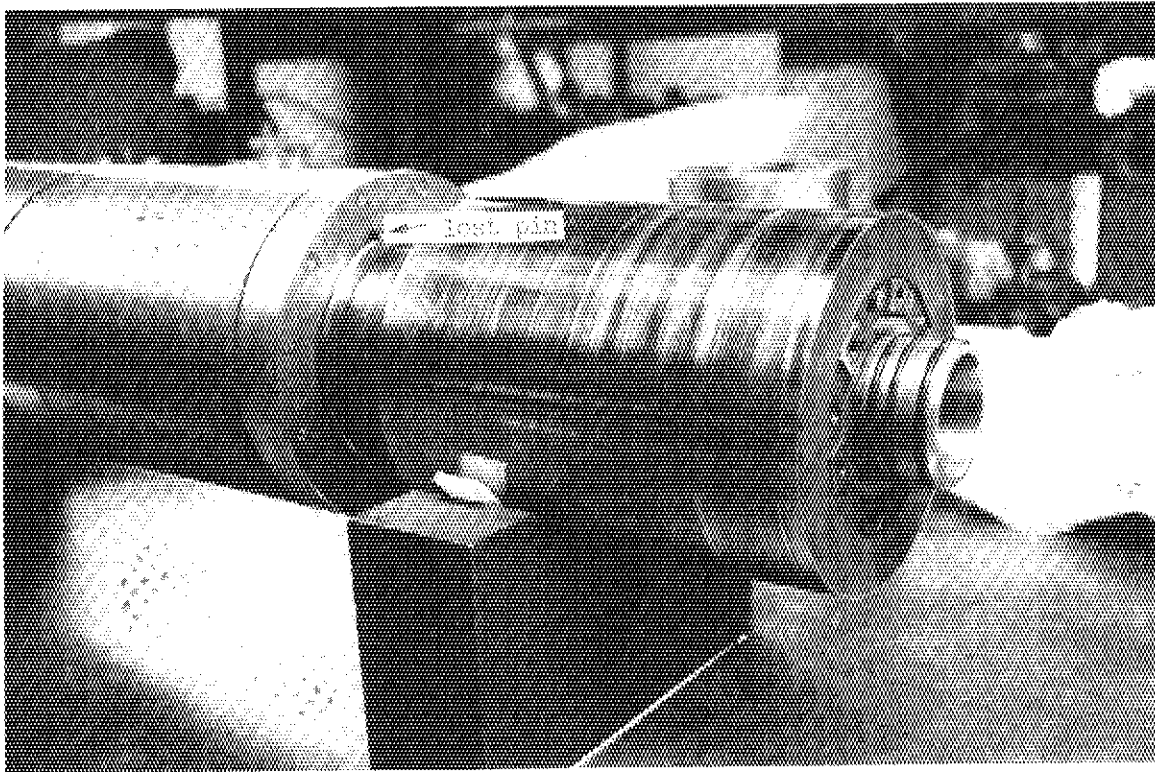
Scratched Lower Journal Shaft and Motor Rotor of B₁
